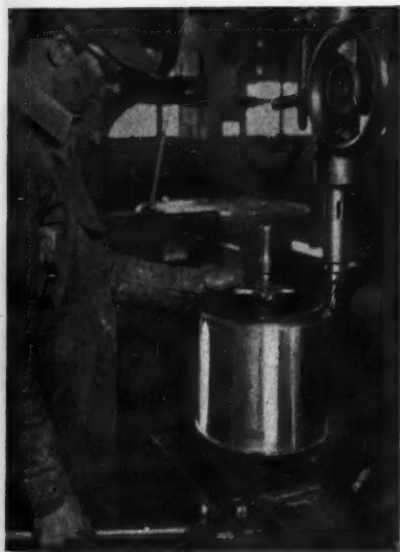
Floating rod bushings are drilled and countersunk in this fixture, which is swung to horizontal position when the piece is properly clamped.
